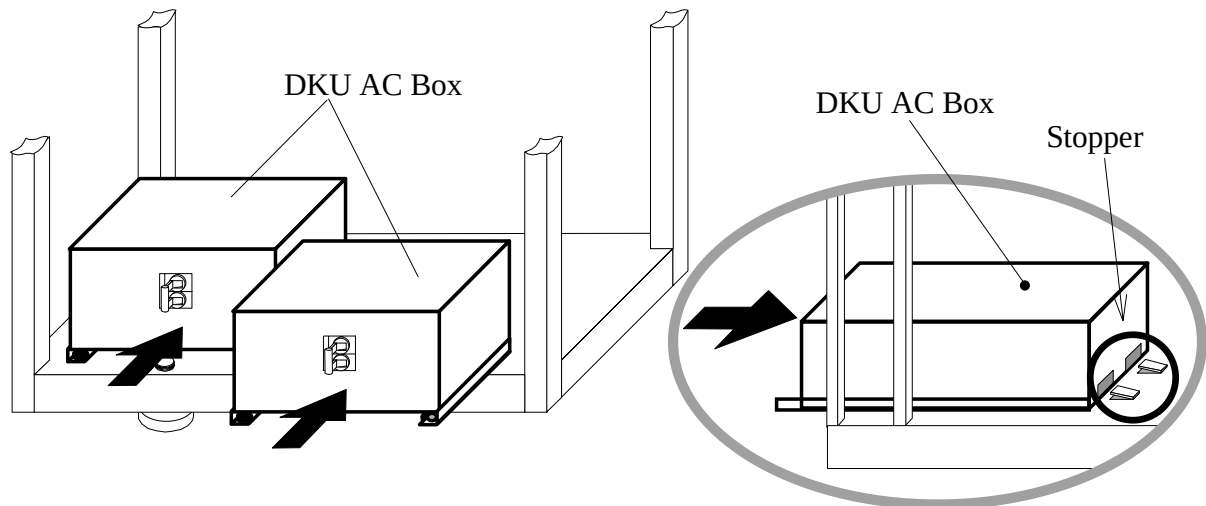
Attachment of DKU AC Boxes
